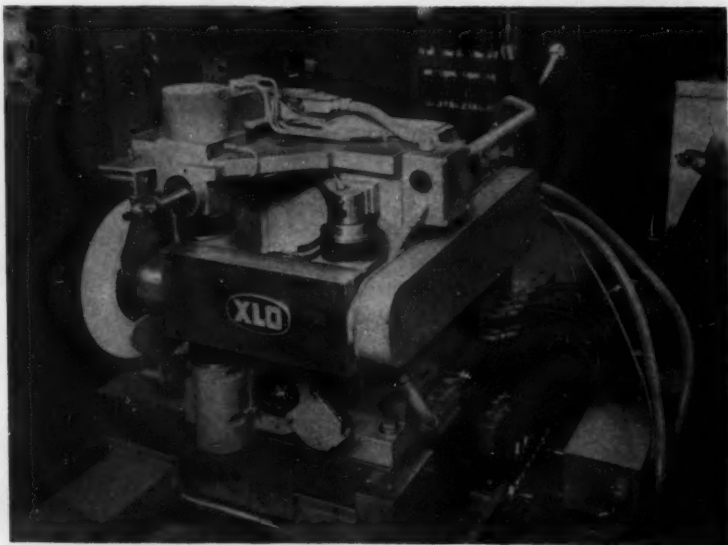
Ex-Cell-O reciprocating grinding unit with automatic wheel dresser. This unit is interchangeable with turning and boring heads used on machine shown in Fig. 1
